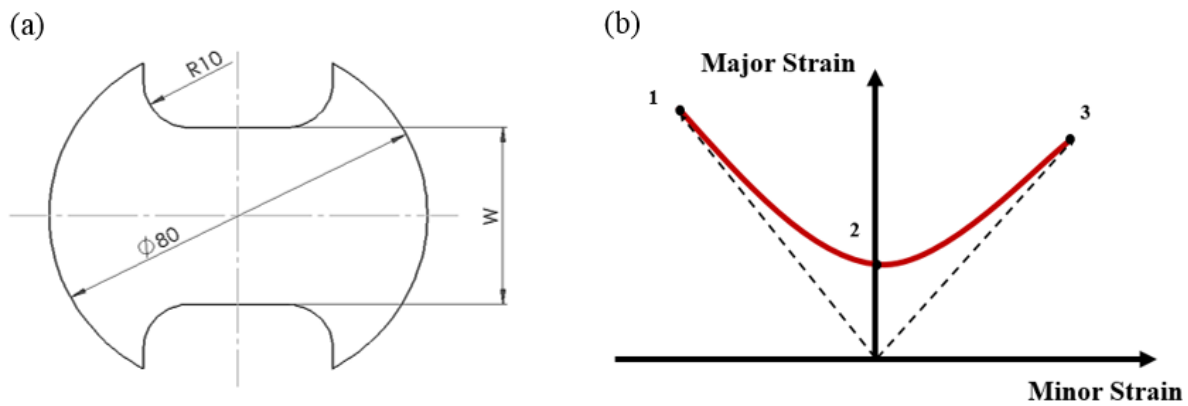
Formability test: (a) blank geometry and (b) schematic drawing of the test points for the FLC
